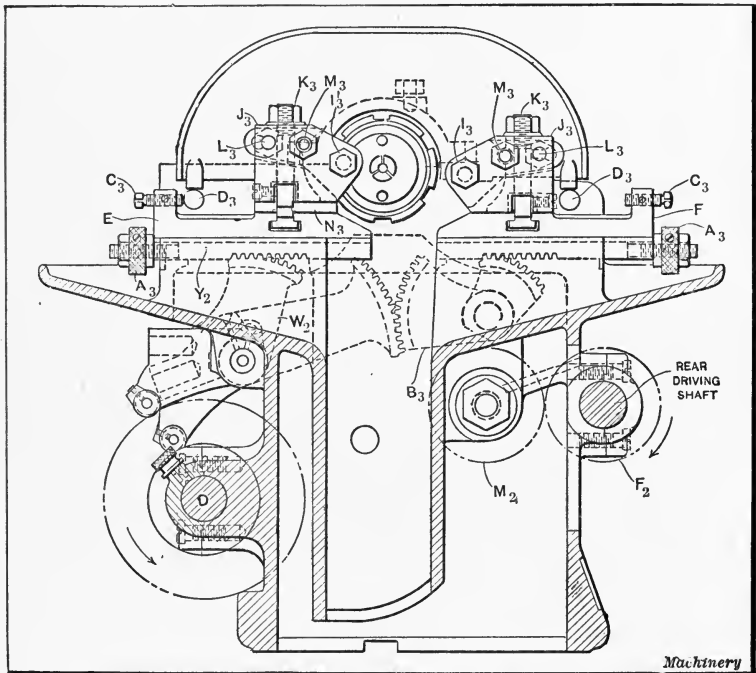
Partial Section of No. 60 Machine showing Mechanism for Operating Cross-slides
